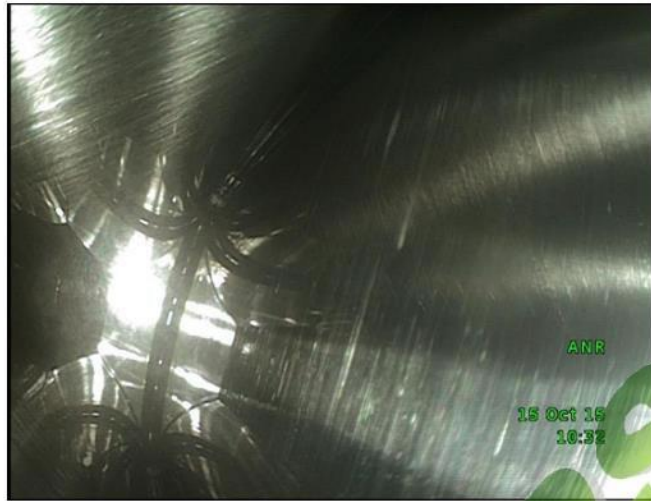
shows bearing position no. 7, the bearing of the low speed shaft at generator side. Small indentation visible at the raceway.
